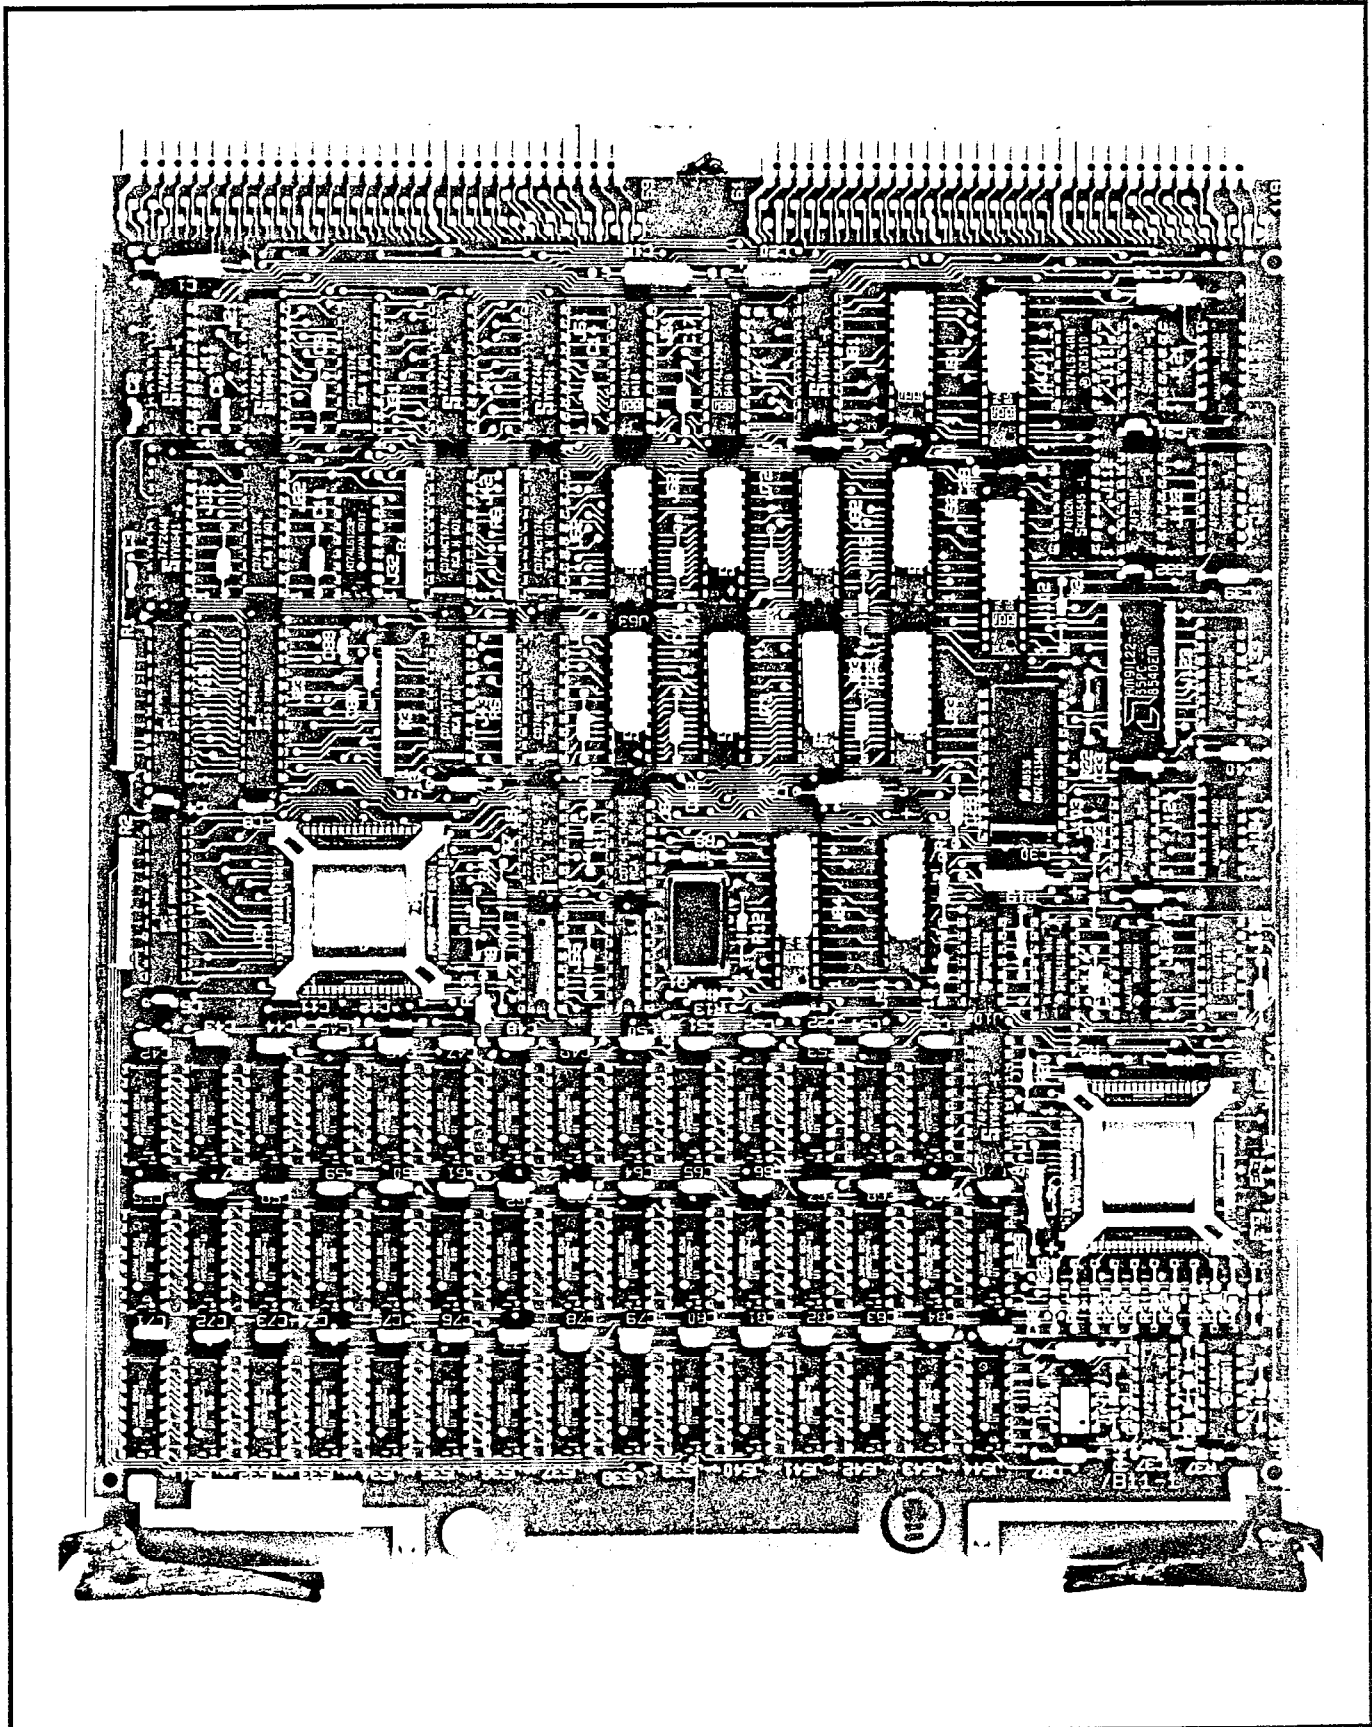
Memory 4 (MEM4) Printed Circuit Board
